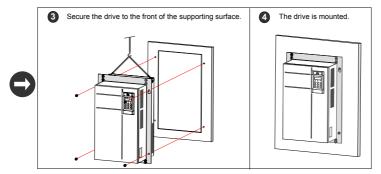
Through hole mounting of MD500ET45G(B) to MD500ET160G
